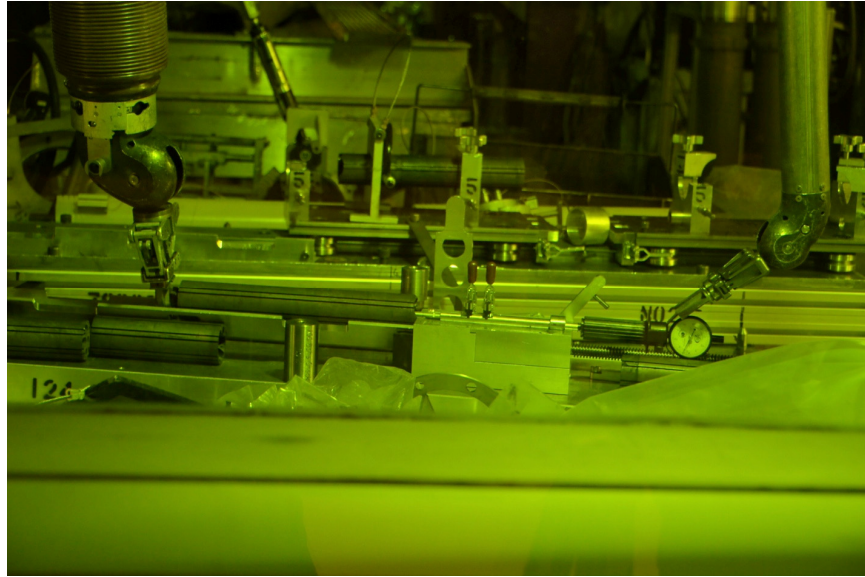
Image of bore hole gauge measuring diameter of inner channel.
